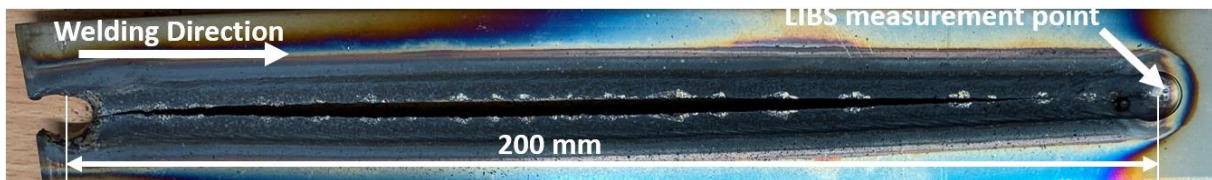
Finished weld seam of the Sample 8, LIBS measurement spot on the weld end crater is marked.
